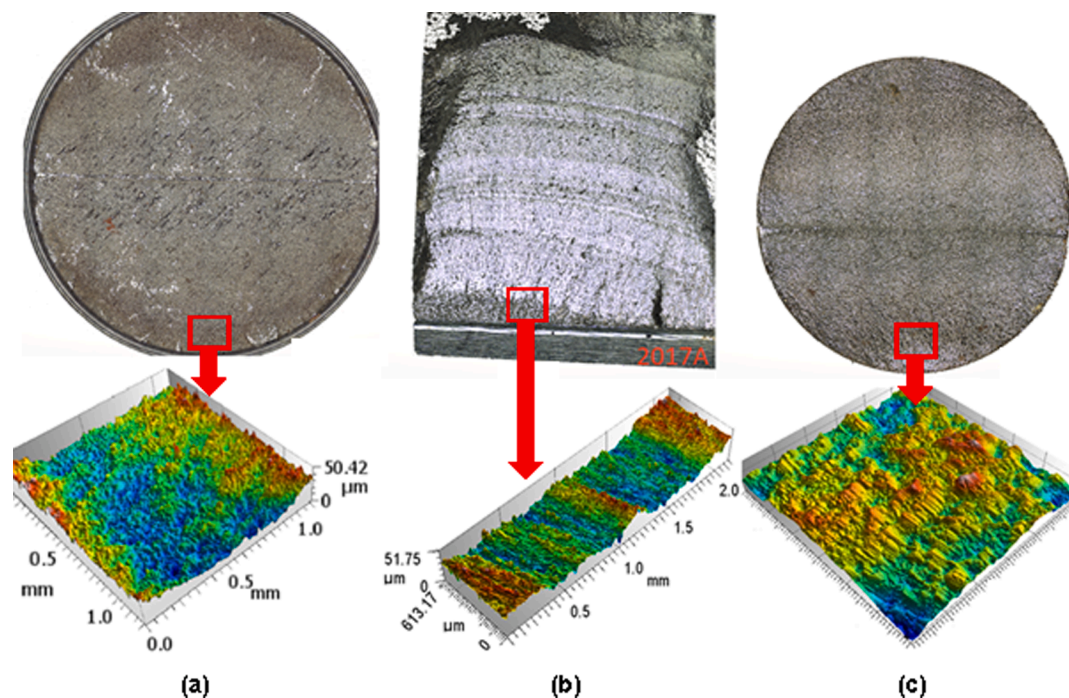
Examples of fracture surfaces resulting from bending loads with marked areas of fatigue crack initiation for the three types of specimens: a) 10HNAP steel, (b) 2017-T4 aluminium alloy, and (c) S355J2 steel.
